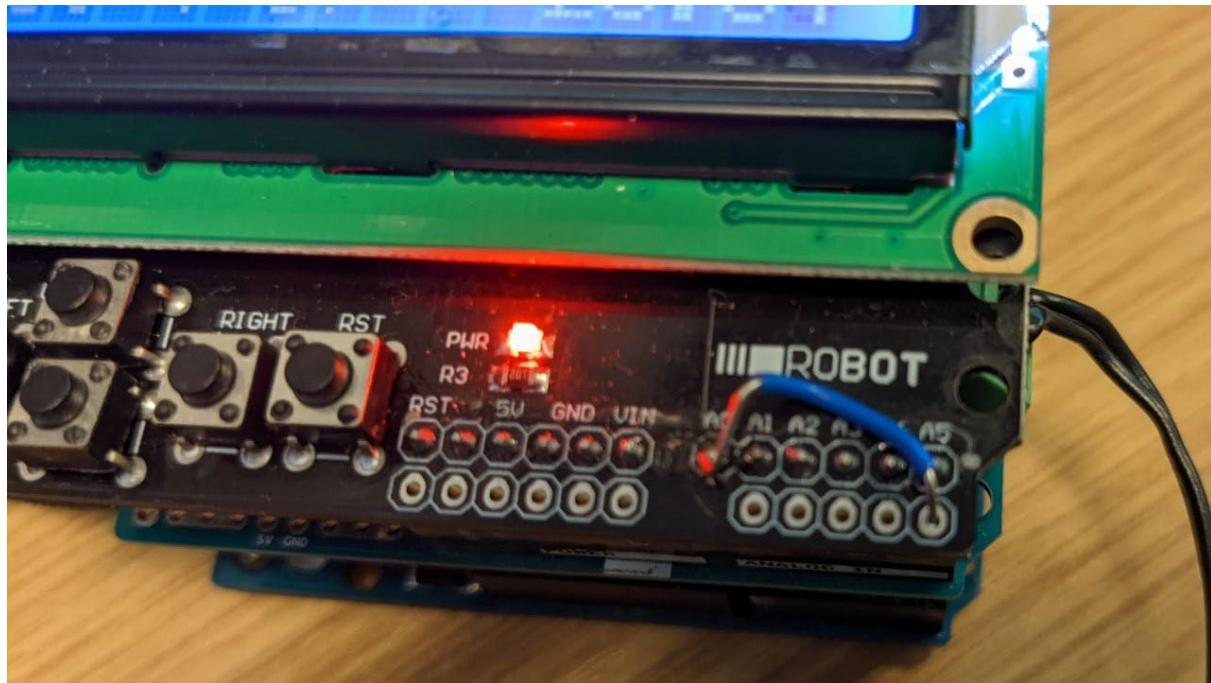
Alternative way to reroute the pins on the LCD shield. You should do a neater job than we did on this one.
